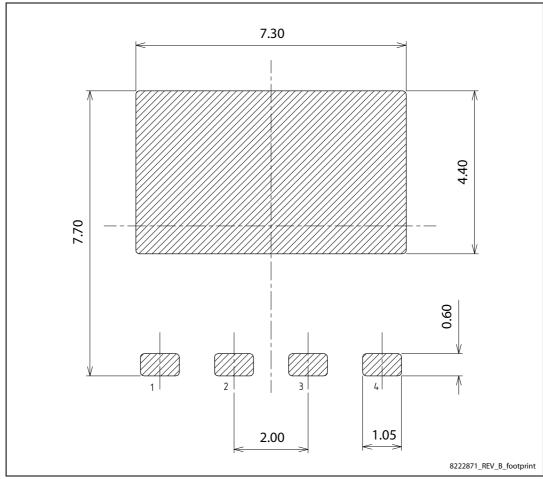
PowerFLAT™ 8x8 HV recommended footprint (dimension in millimeters)
